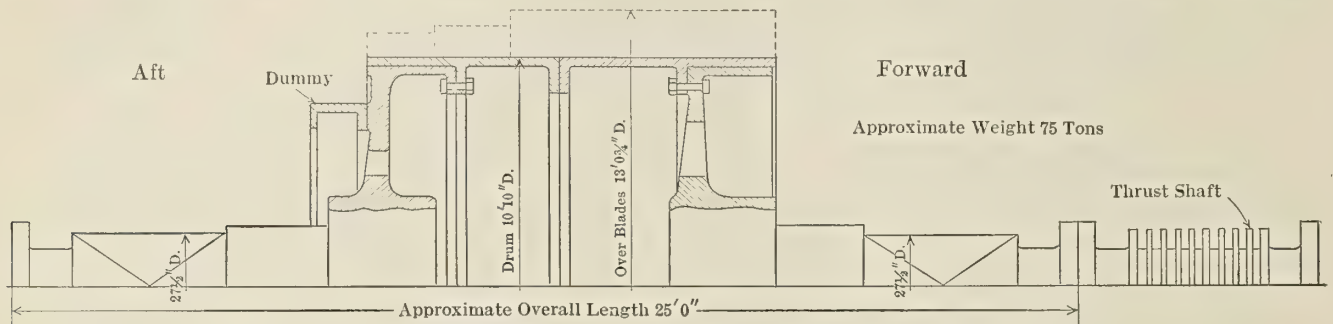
Half Section of Low-Pressure Astern Rotor
